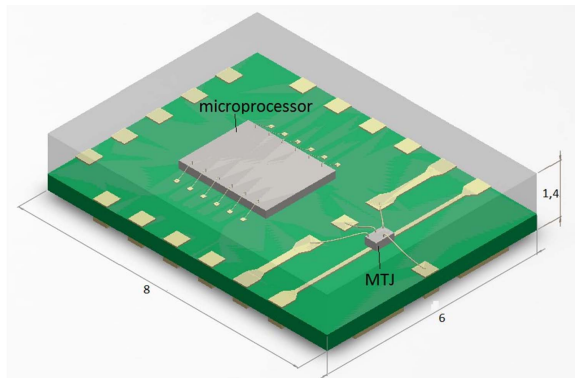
Isometric view of the CoB package proposal. Dimensions in mm.
